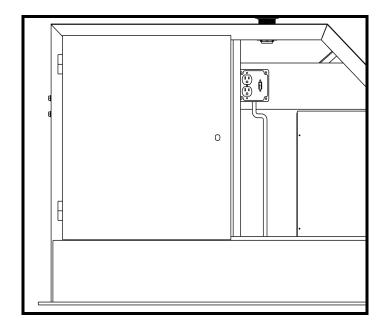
Location of Flexible Conduit Installation to AC Junction Box
